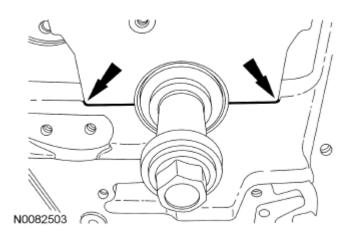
Locating Main Bearing Beam Side Fit Surfaces Courtesy of FORD MOTOR CO.
